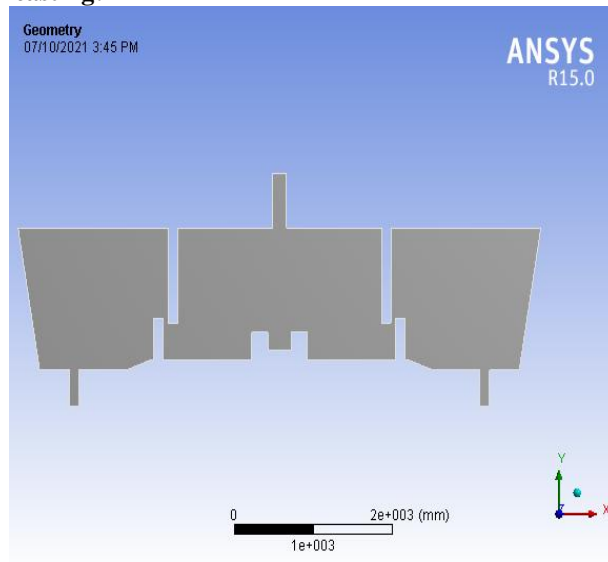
CAD model of tundish casting for non – plasma heating.
